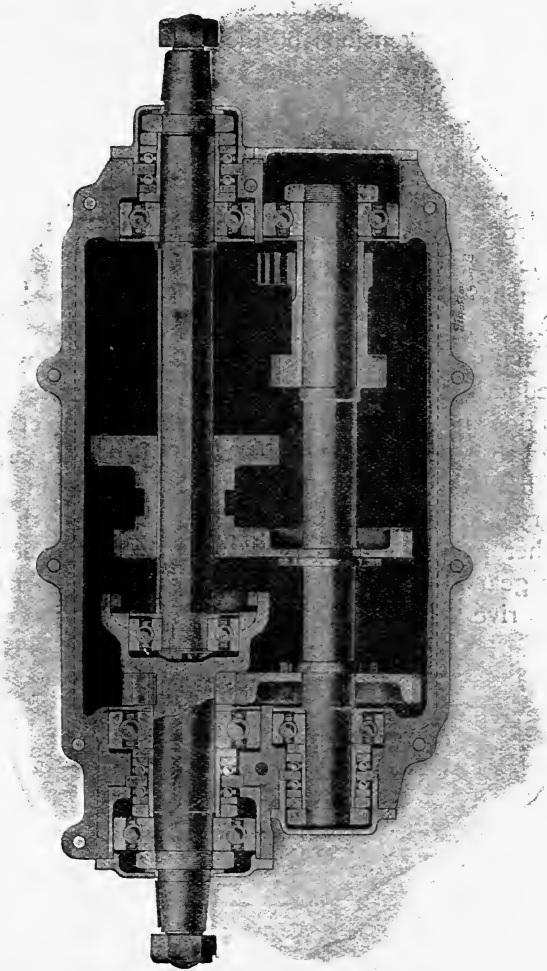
Gear Box fitted with Hoffmann Ball Bearings.
